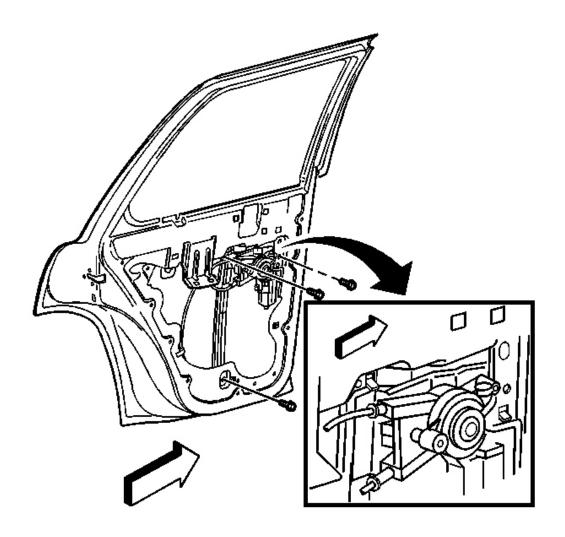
View Of Window Regulator Assembly Courtesy of GENERAL MOTORS CORP.
